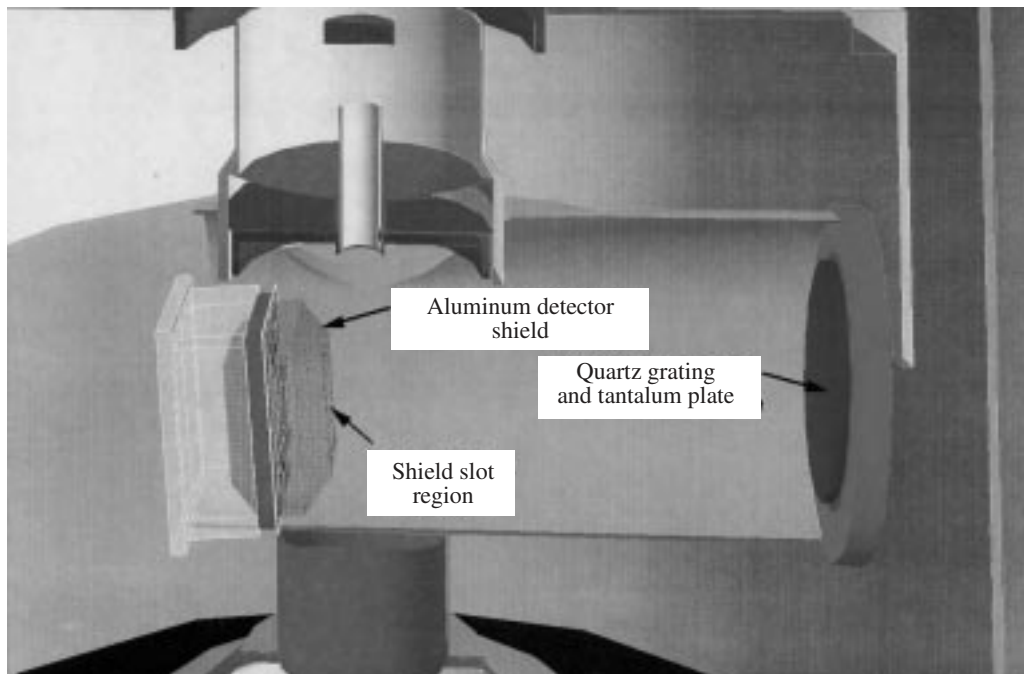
CAD Model details of SAGE III detector and shield assembly.
